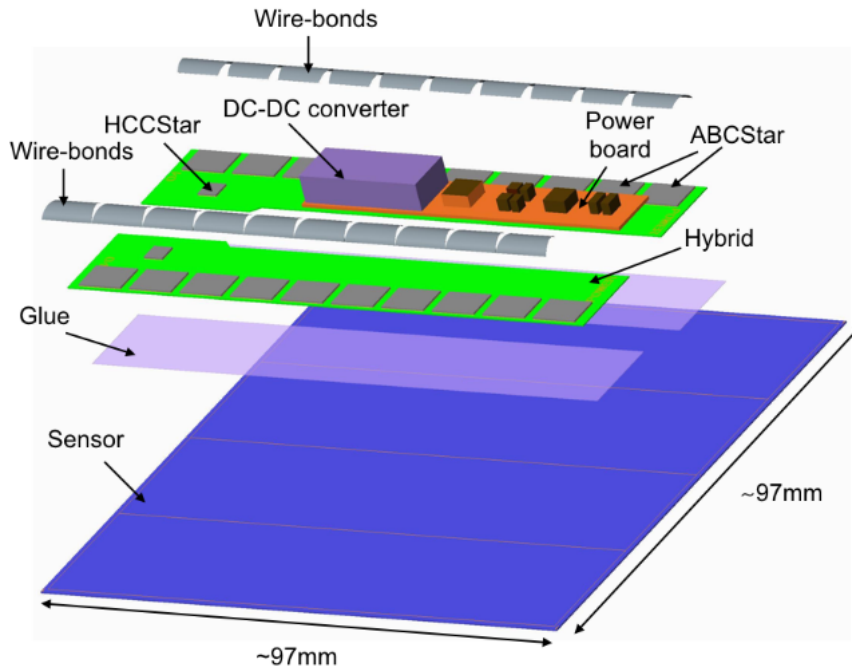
Exploded schematic of a barrel short-strip module, containing a silicon sensor (blue), two hybrids (green) and a power board (orange) with a DC-to-DC converter (purple), all glued and wire bonded together. The AMAC would be the large chip represented next to the DC-to-DC converter. Each hybrid holds ten ABC(Star)s and a HCC(Star) (grey) [67].
